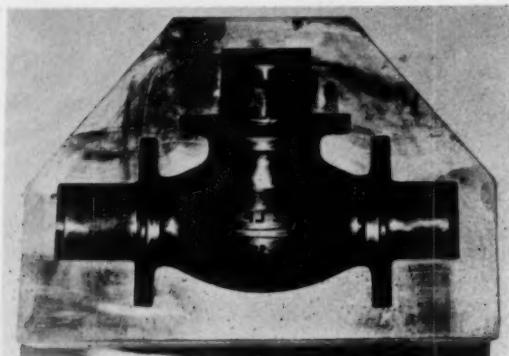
Metal faced mold ready for use, dehydration of plaster unnecessary.
